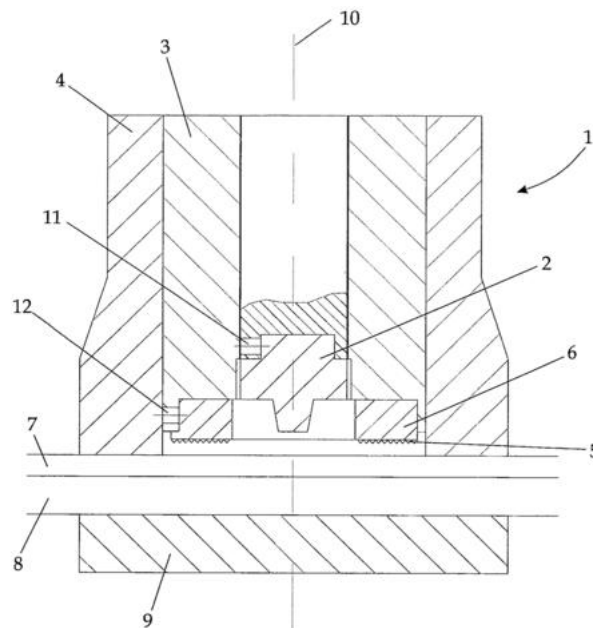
Device for friction stir spot welding of two workpieces with a hollow cylinder having a detachable friction liner with a tool [110]
